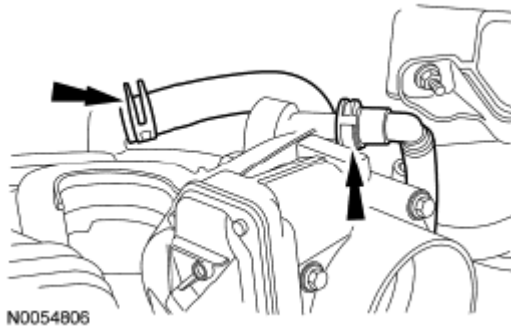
Locating Vacuum Hose & Evaporative Emission Tube
